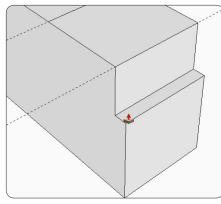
Using the Push/Pull tool to create the upper face of the tongue.
